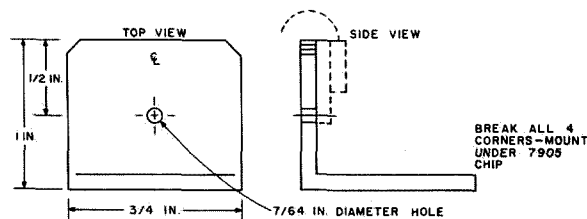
Heat sink detail. Use 1" x 1" x 1/16" aluminum angle cut 3/4" wide or fabricate it from aluminum or copper stock.
